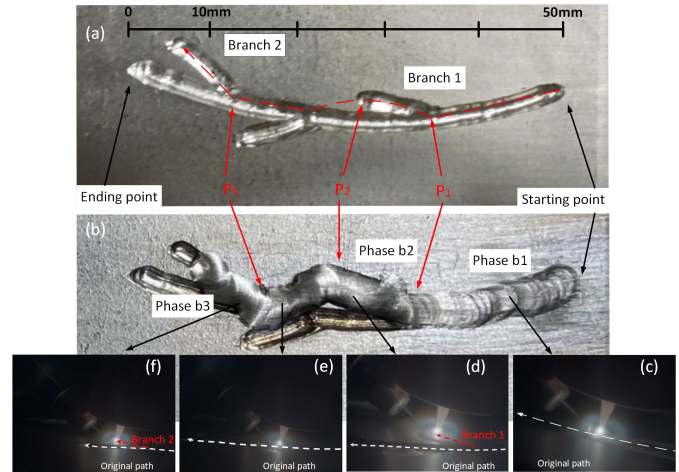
TIG welding: (a) welding follow the original path; (b) welding with real-time human inputs
